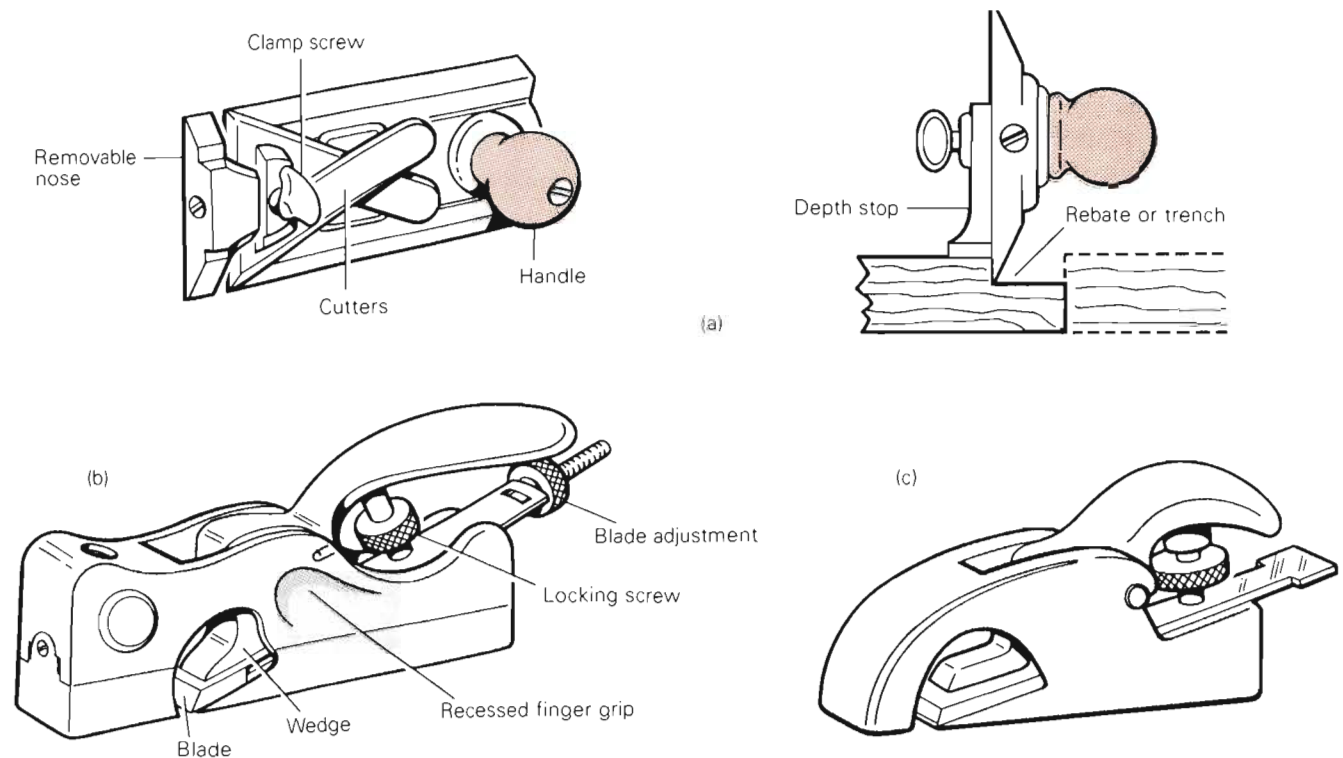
Other special purpose planes: (a) side rebate plane, (b) shoulder plane, (c) bullnose plane.
